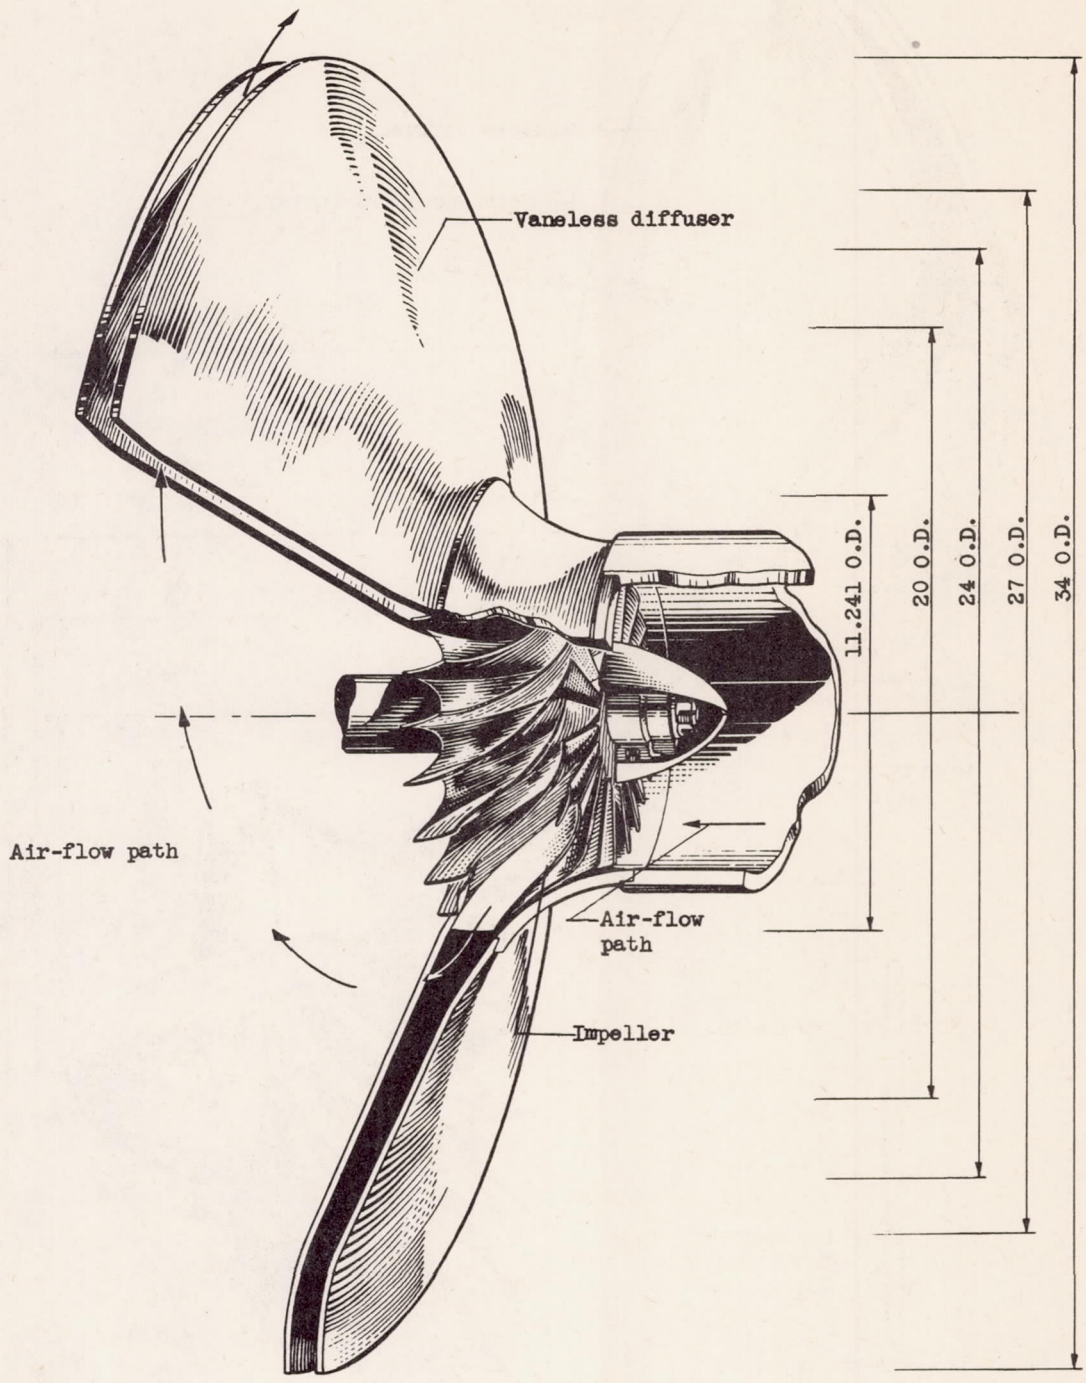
Assembly of vaneless diffusers with mixed-flow impeller. (All dimensions in inches.)
